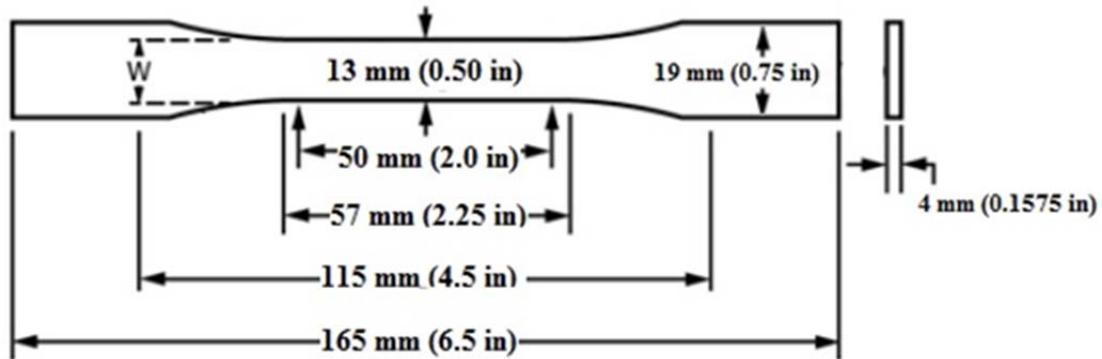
Drawing of Nylon Dog-Bones Tensile Specimen With Dimensions
